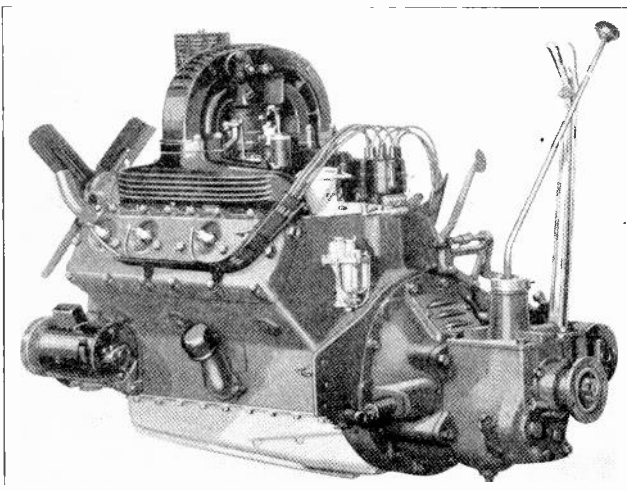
V-type, eight-cylinder engine with cylinders arranged in two banks of four each. Carefully compare the construction of this engine with the "line eight" type shown in Fig. 16. Courtesy Oldsmobile Viking Mfg. Co.
